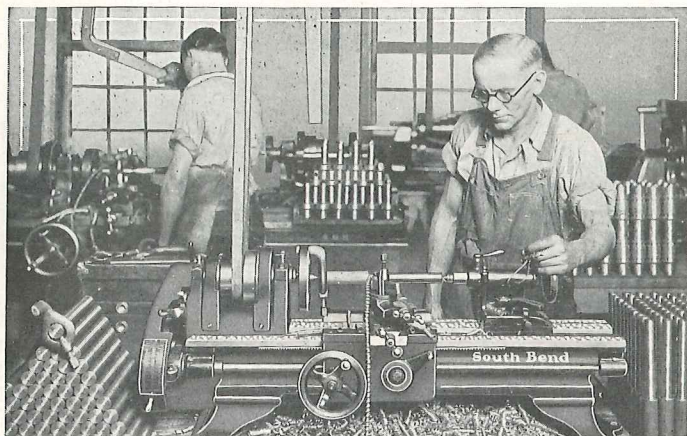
A 9-inch Bench Lathe on a Manufacturing Job
